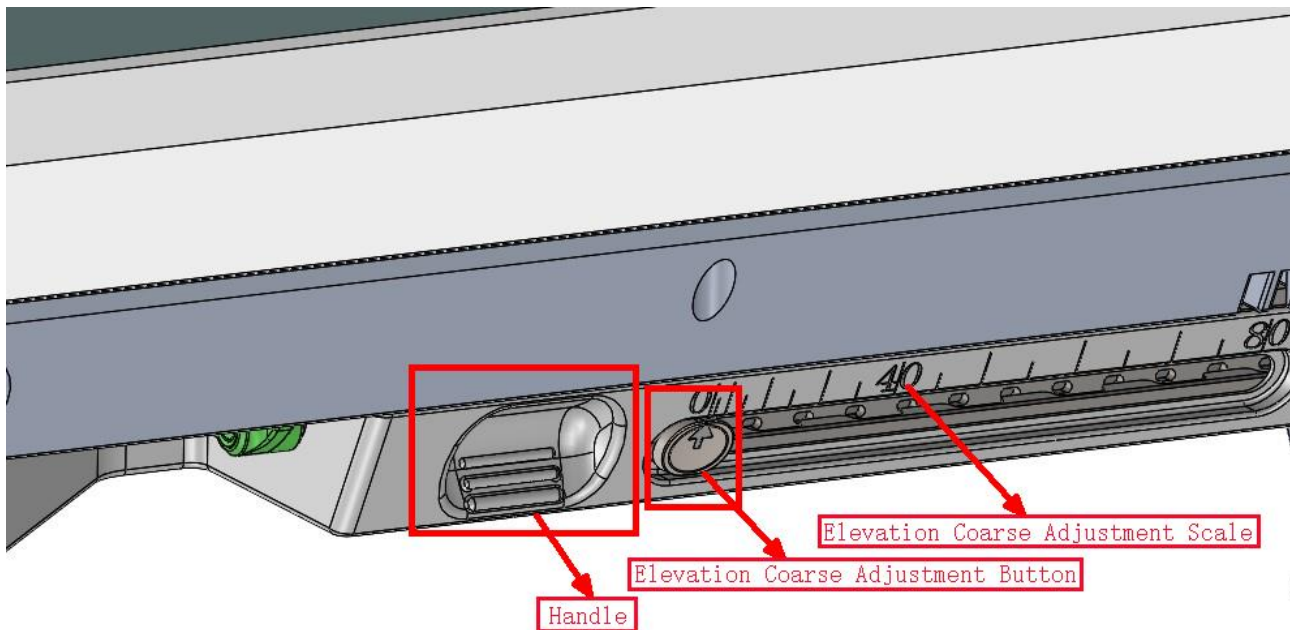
Elevation Coarse Adjustment Knob and Scale
